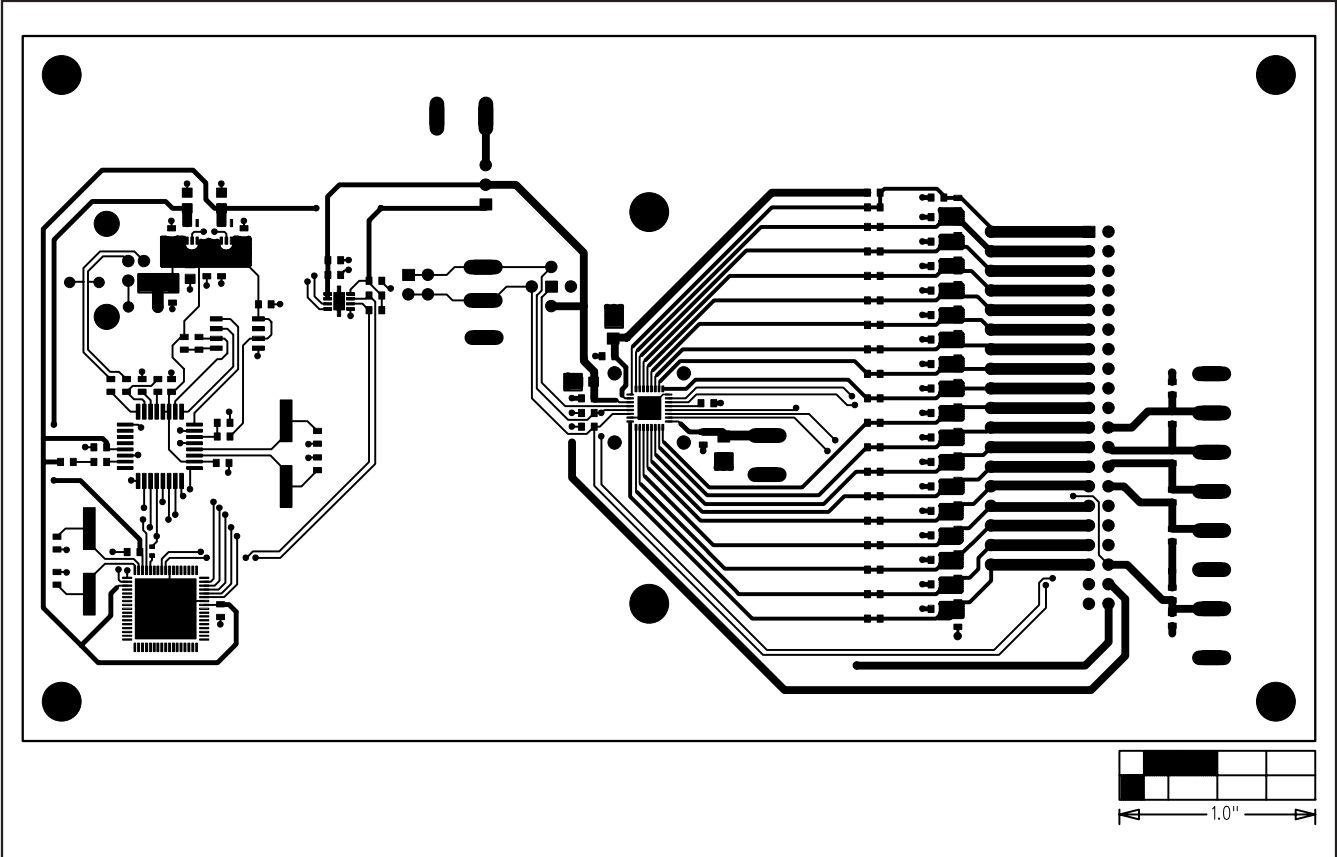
MAX9694 EV Kit PCB Layout—Component Side
